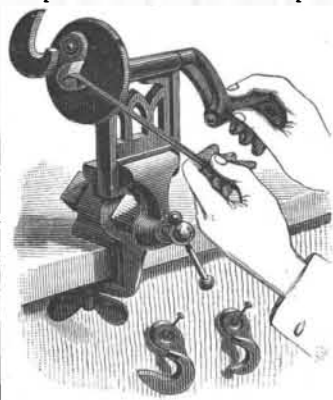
TOOL USED FOR BENDING THE SPIRALS.
